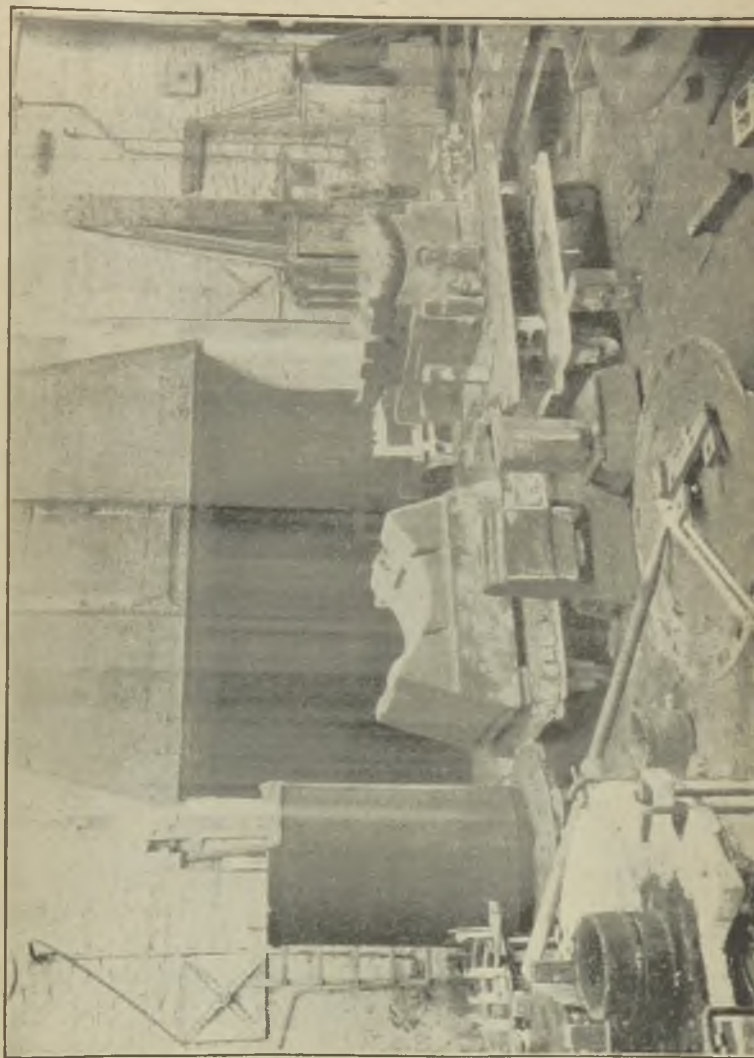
shows the square foot core in position; Fig. 7, the blank chest with chill marked in white; and Figs. 8 and 9 are of the other side of the cylinder, showing round foot cores in place.
